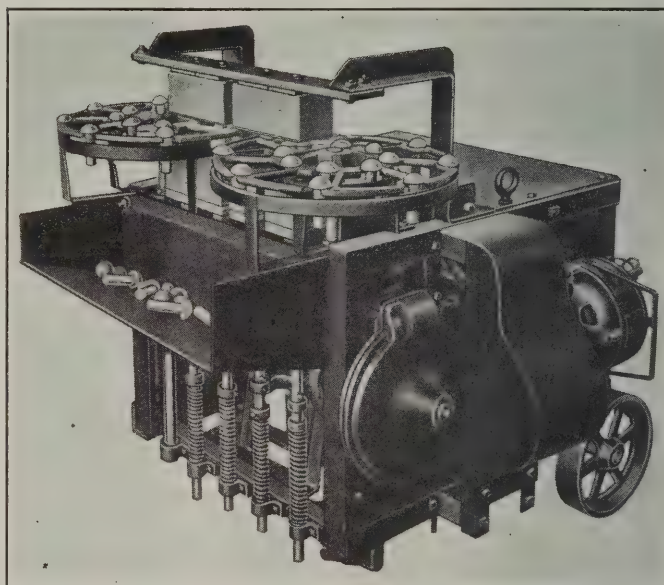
Automatic Electric Rivet Heater for Use When Making Long Runs on One Size of Rivet
